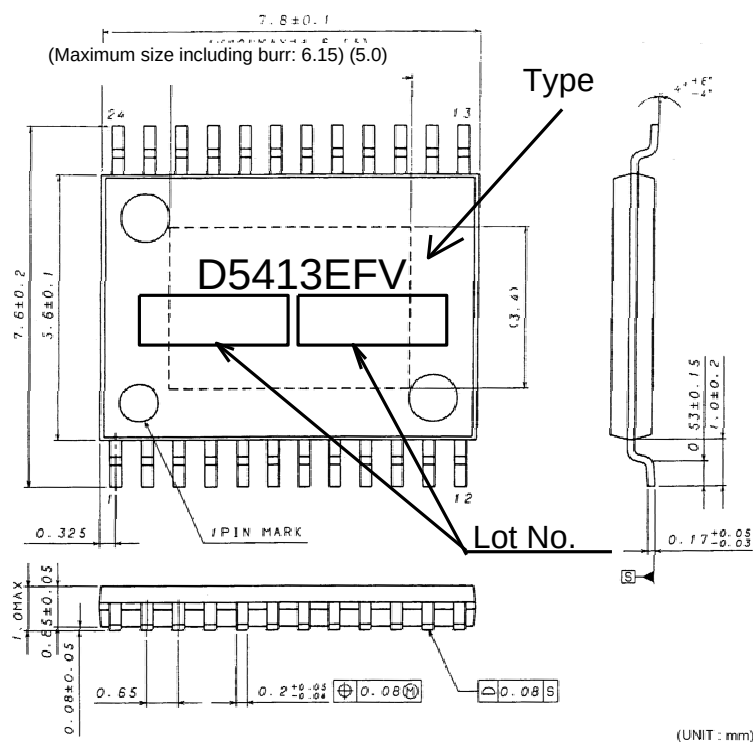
Outer Dimensions and Inscriptions of the HTSSOP-B24 Package
